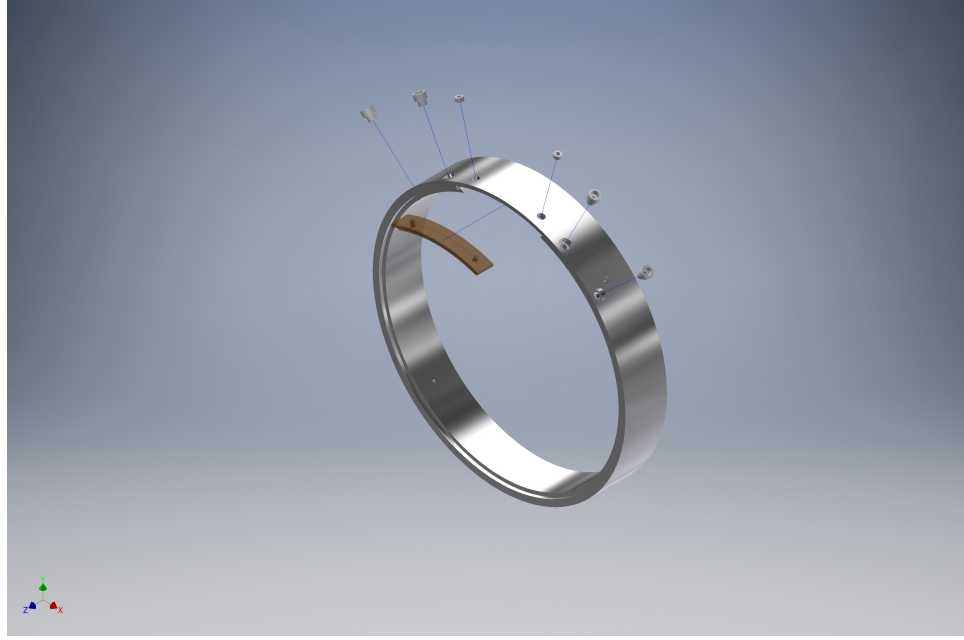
Schematic drawing showing assembly drawing of casing survey ring with inset plasma actuator
